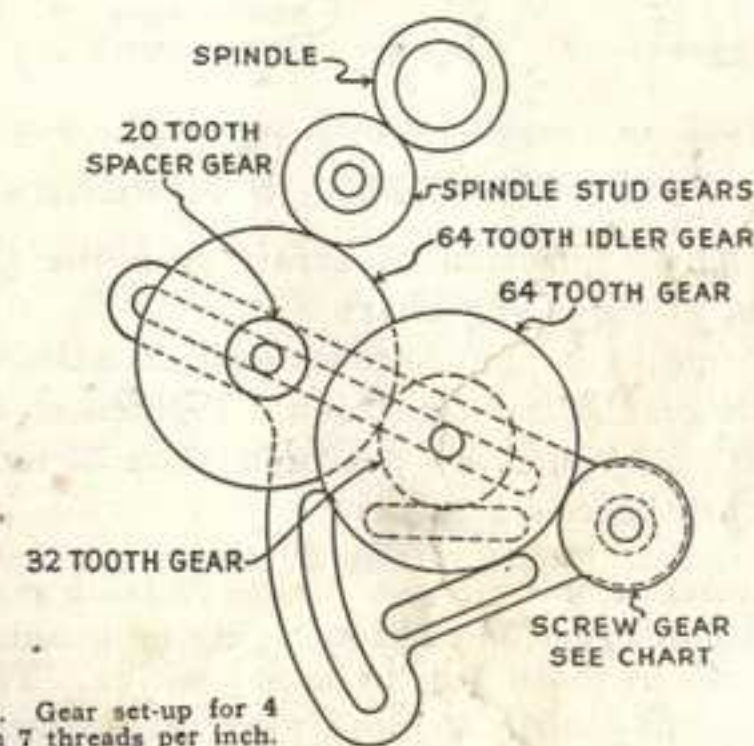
Gear set-up for 4 through 7 threads per inch.
